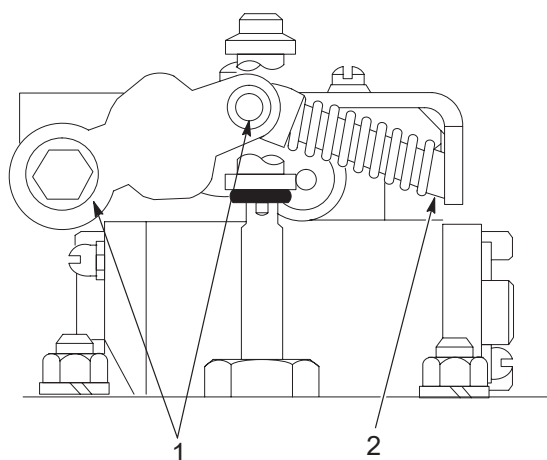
Air Valve Shifter Mechanism Lubrication (Front View)
